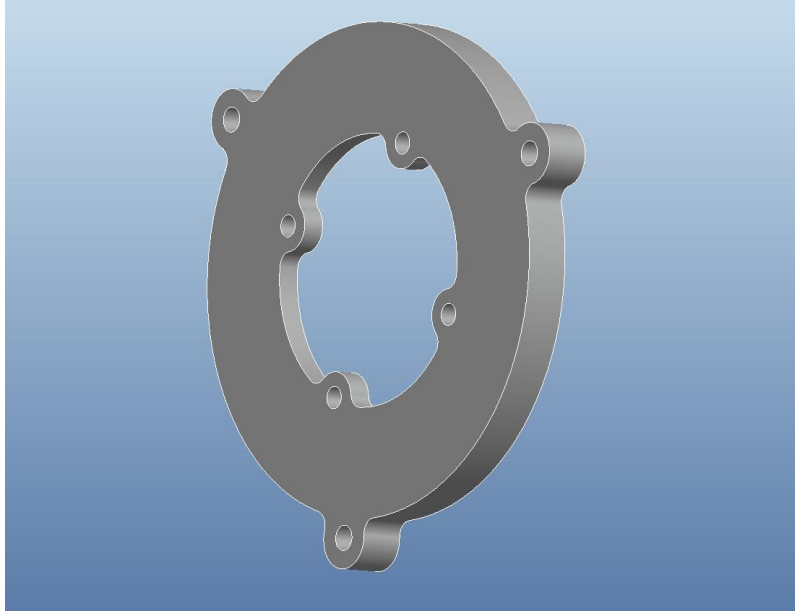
SAMI NSTX-U mounting bracket design. The inner ring of holes is to support the SAMI array while the outer holes are to secure the bracket onto the port flange.
